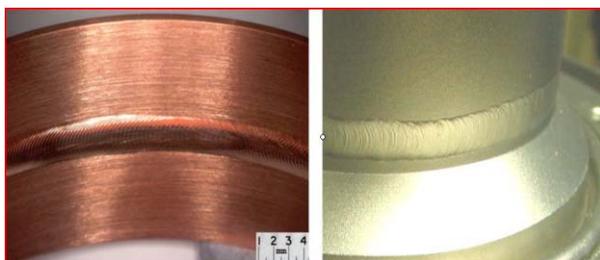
Examples of TIG welding on coupler components. Left: e2v Ltd [3] and right: ACCEL Instruments GmbH [9].
